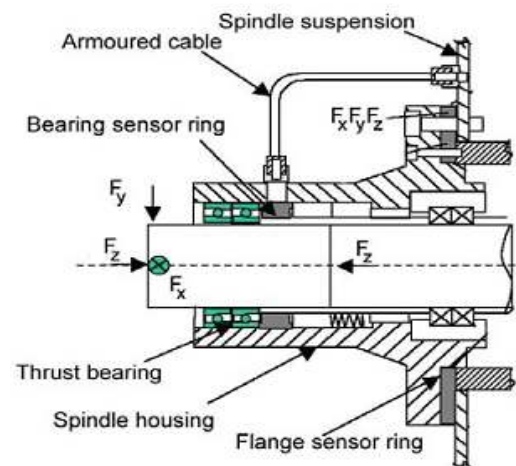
Detail of spindle-integrated forces sensor combined with bearing and flange sensor rings (Byrne and O'Donnell, 2007)
